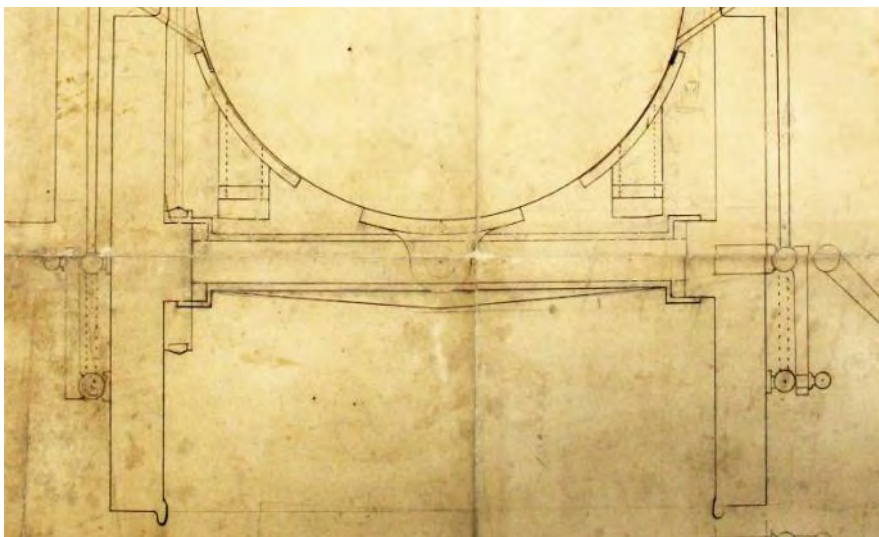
Rear end view of the proposed tilting axle tube.
